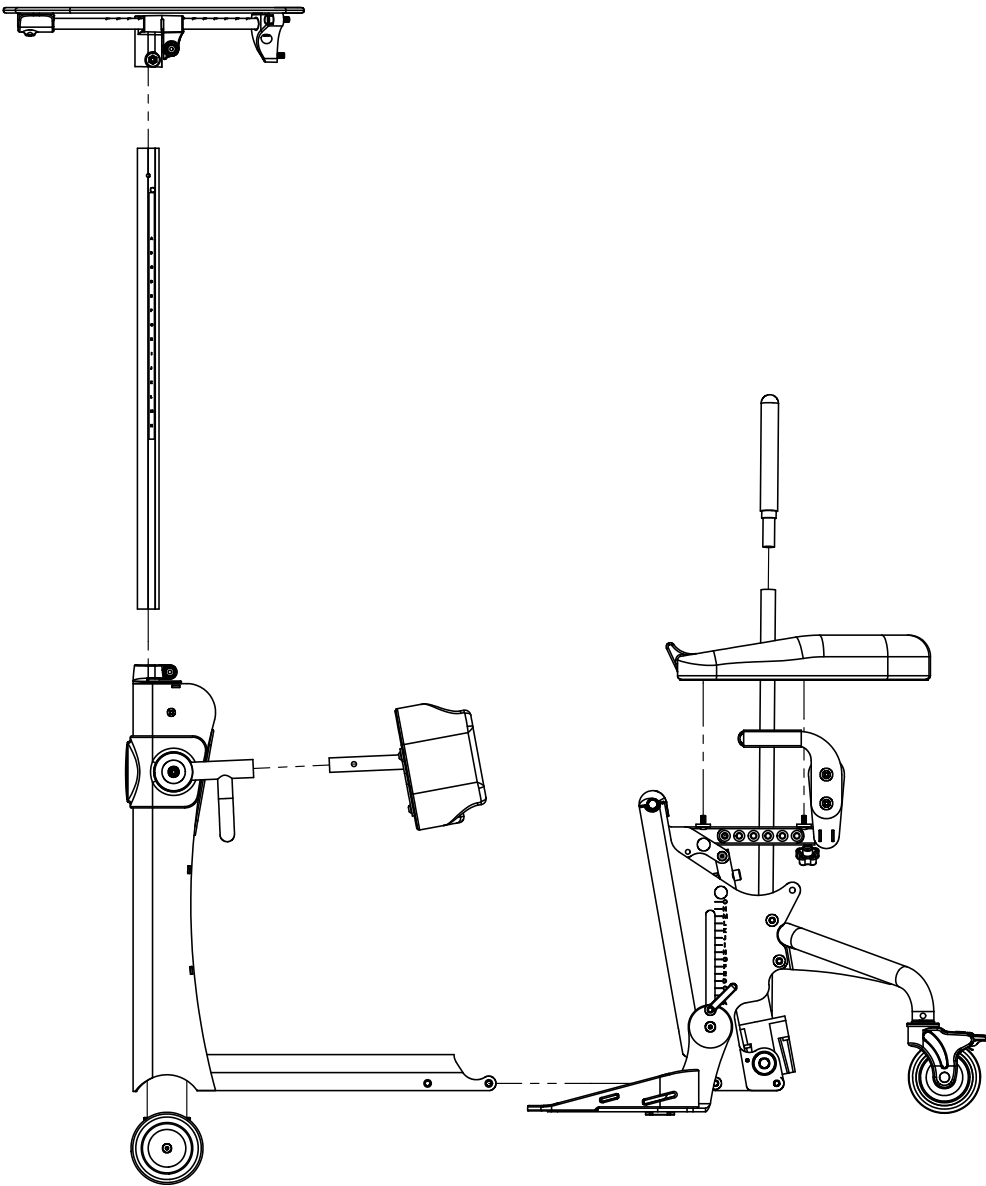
Install the table arm rest to the unit with the two bolts attached. Tighten bolts securely.
